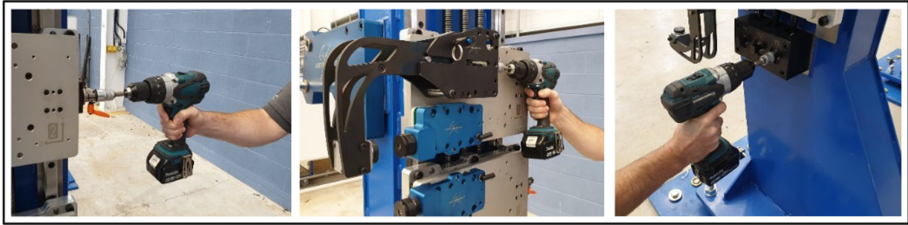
Manual adjustment of the VADIS fixture with use of common power tools
